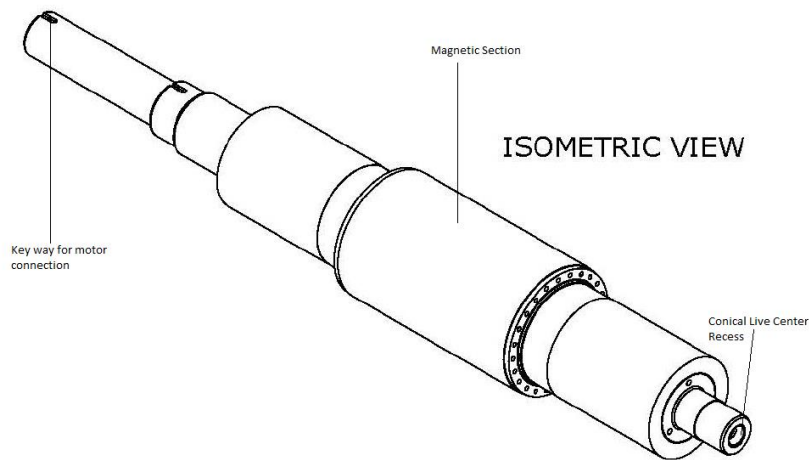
Isometric view of rotor, from left to right, showing the key way for motor connection, magnetic section, and the conical live center recess.
